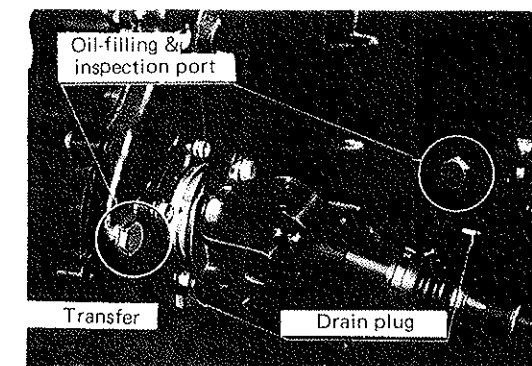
Transfer Case Oil-Filling & Inspection Ports
